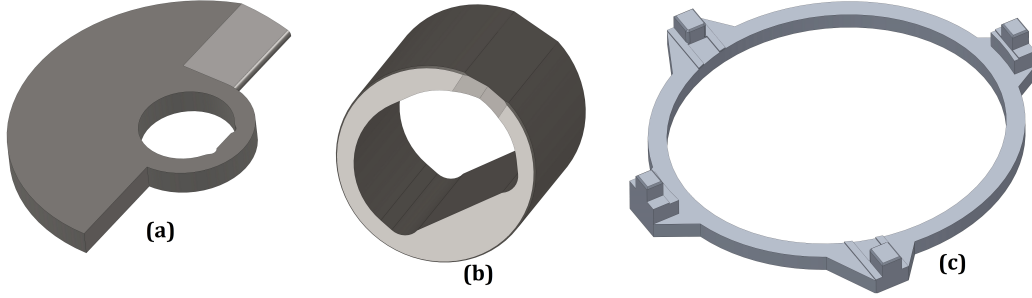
Counterweight (left), shaft adapter (middle) and Oldham joint (right)
